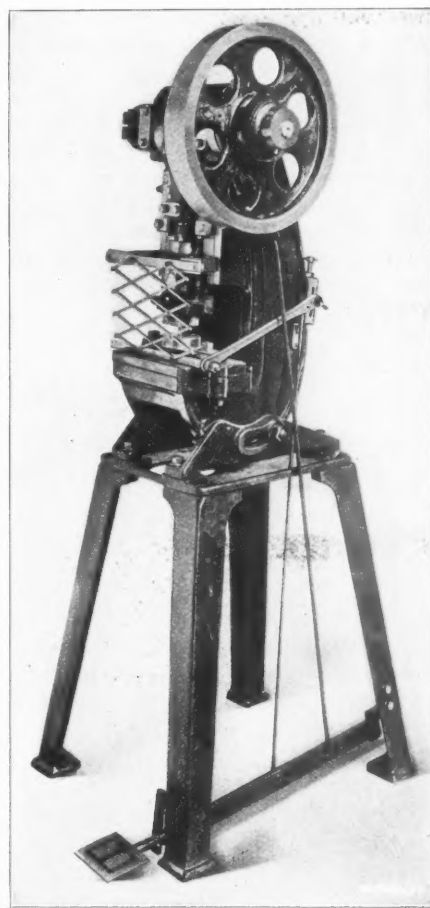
Geuder, Paeschke &amp; Frey "Lock" Type of Guard
